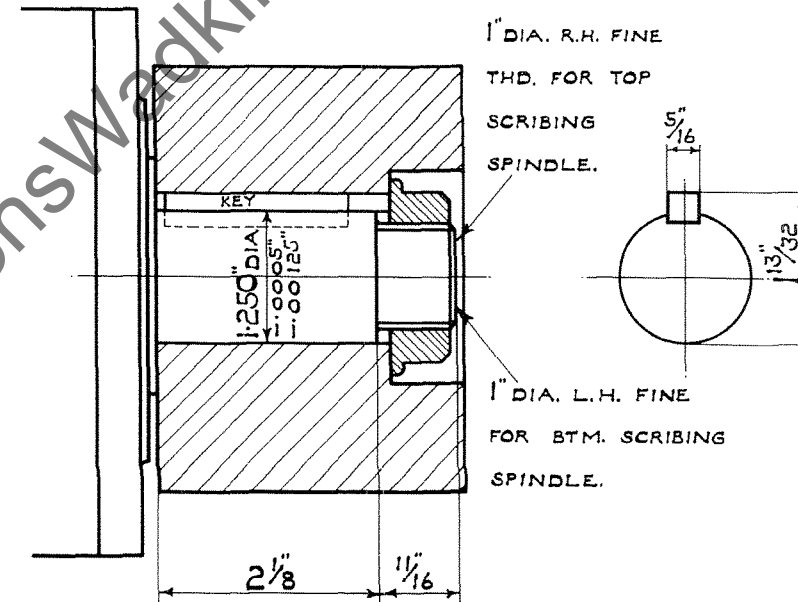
SCRIBING OR COPE HEAD SPINDLE END.
